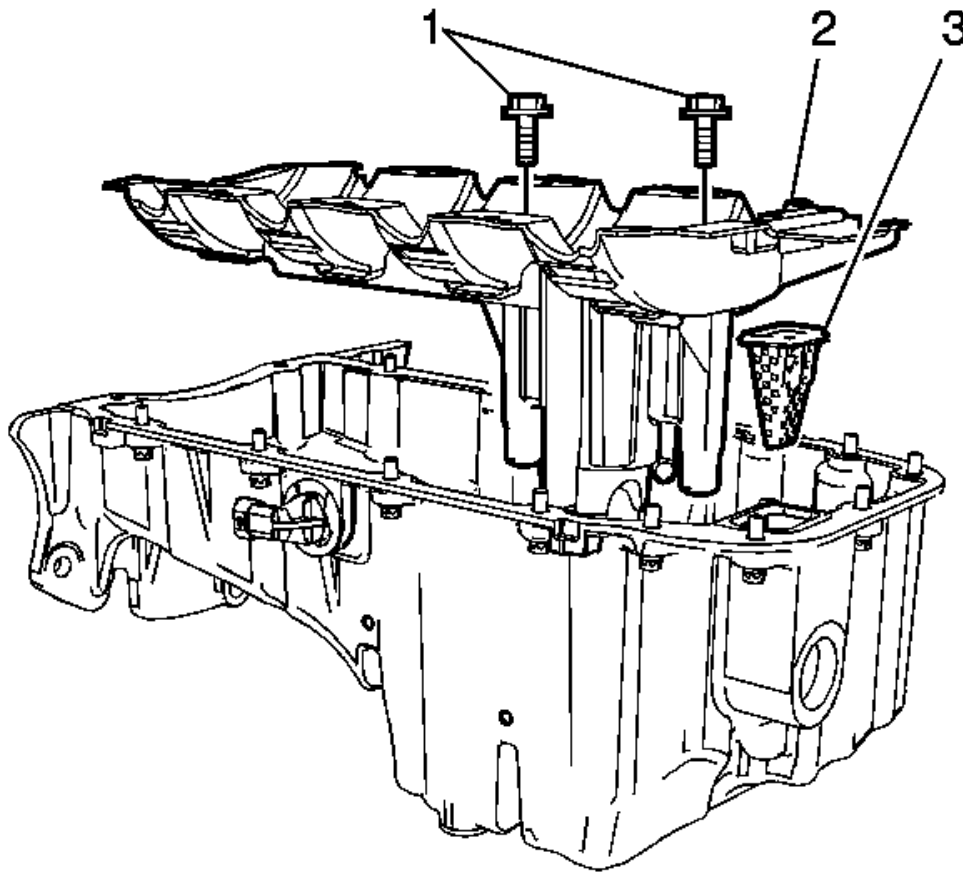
Oil Pan Baffle & Oil Suction Filter
